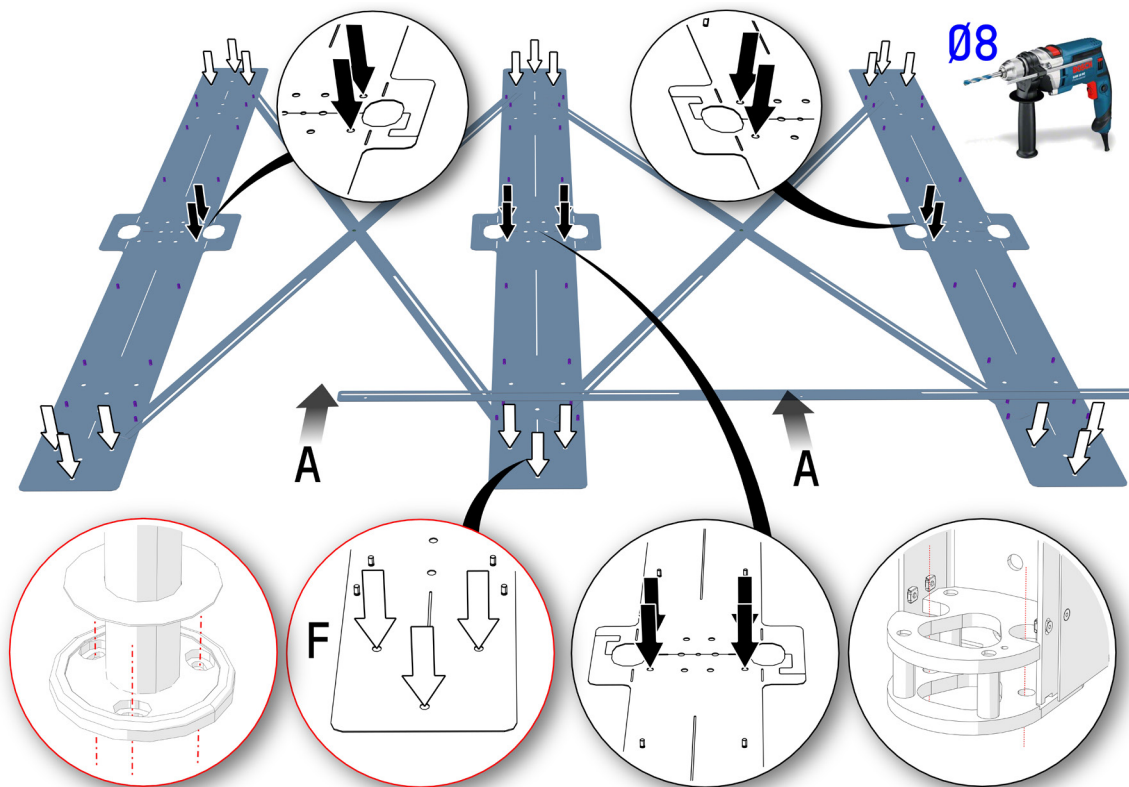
Railing post and kinematic post anchoring points - STD models (long).
